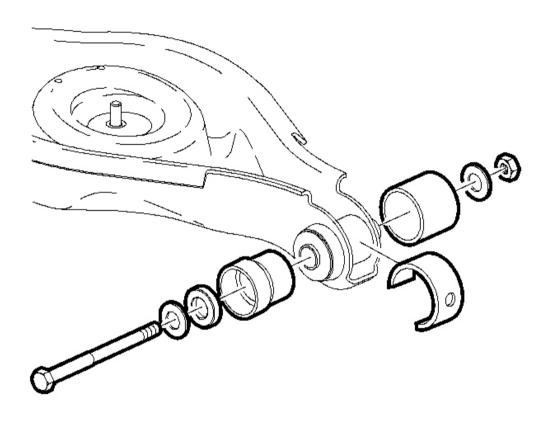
Push Out Socket & Control Arm Courtesy of GENERAL MOTORS CORP.
